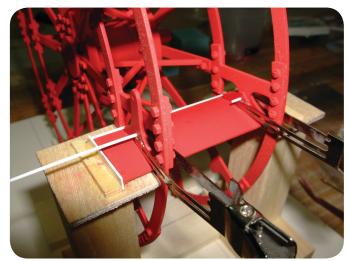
The clamping tools used to hold the frames while they are glued in place.
